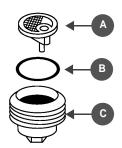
Fuel Sediment Cup Assembly Pieces
